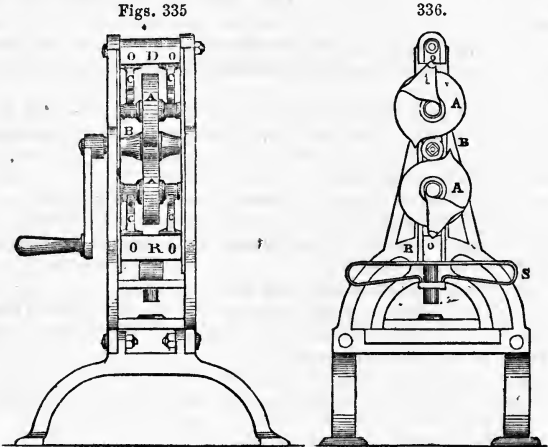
is a side view with one side of the frame removed. A press constructed in this way, the follower moving down a spring S, may be used to return the moving parts when the press is relaxed.
